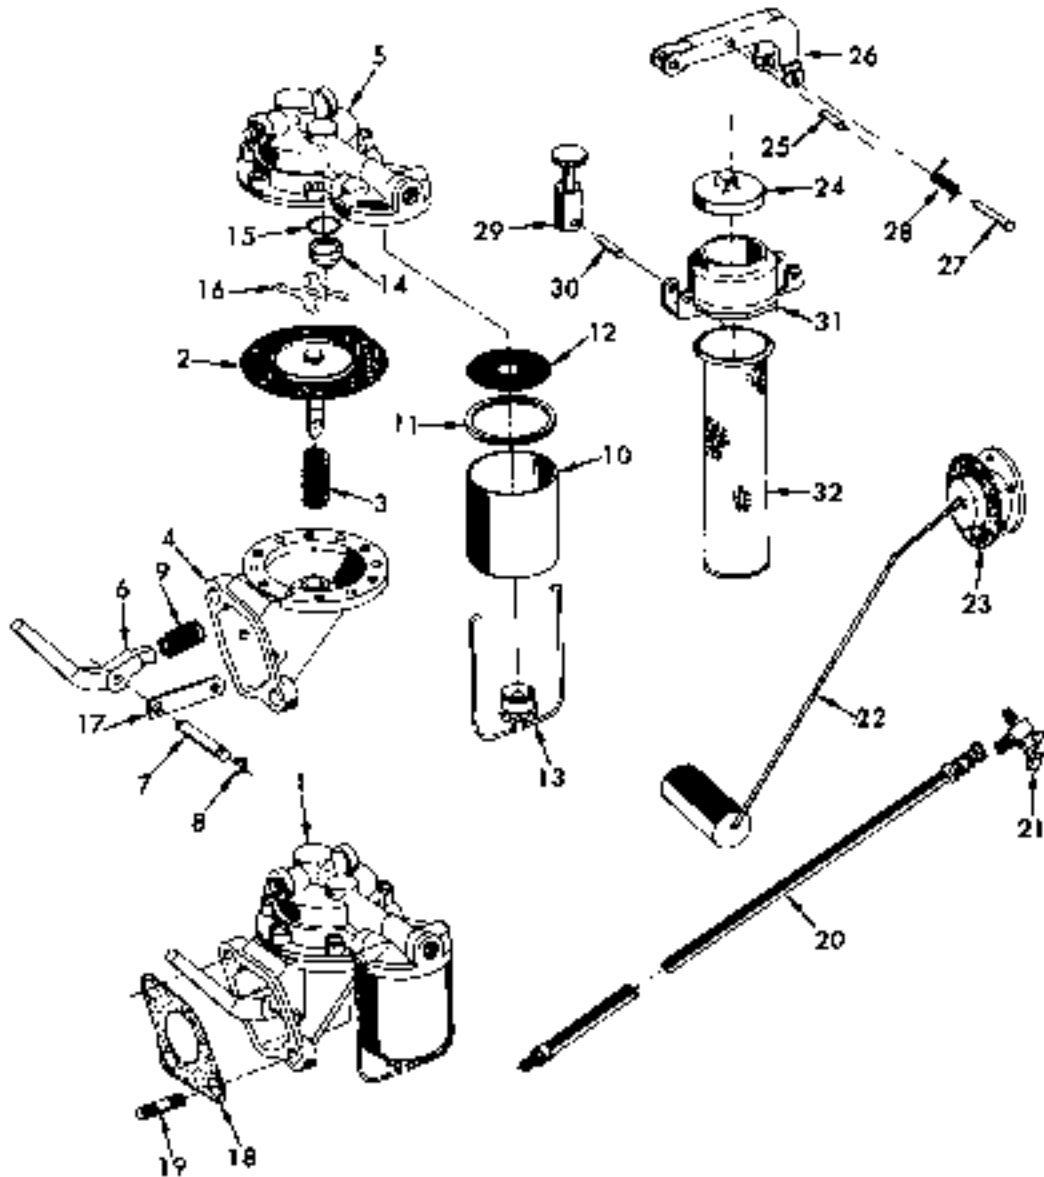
FUEL PUMP AND FUEL FILLER
